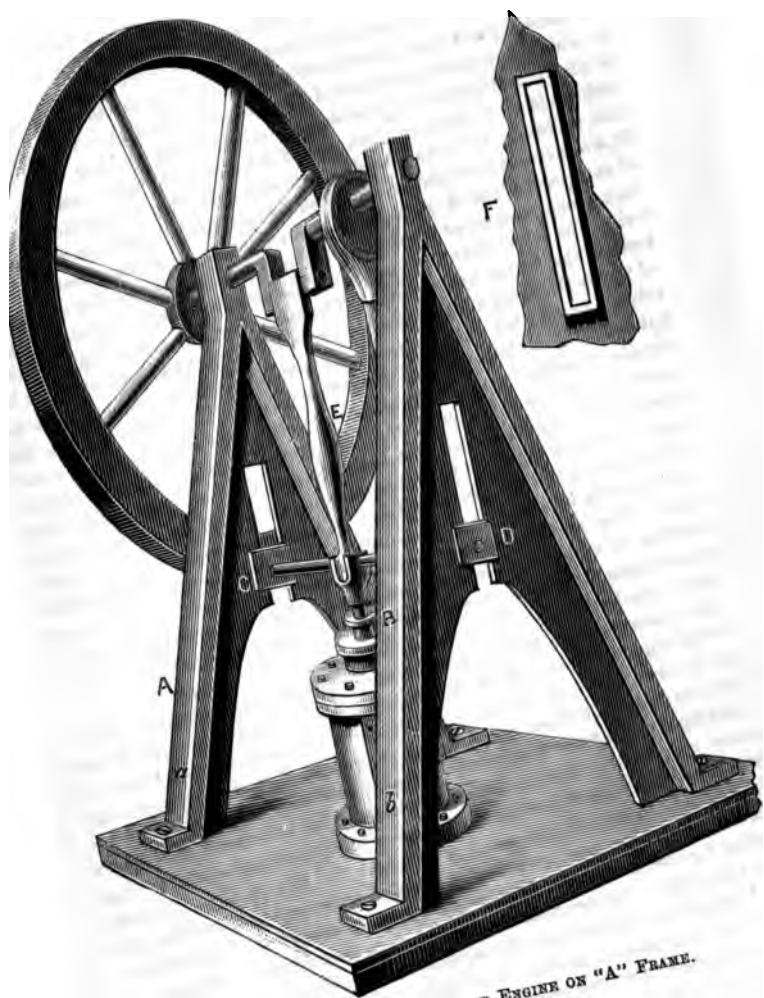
VERTICAL CYLINDER ENGINE ON "A" FRAME.
